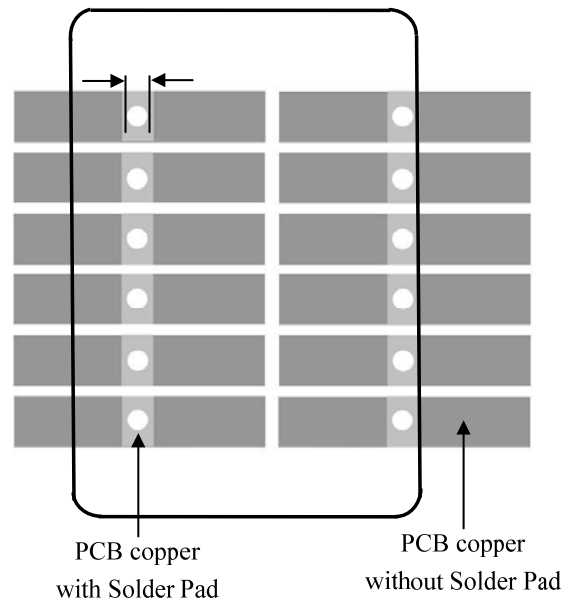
Top View of the Bottom Side of the recommended PCB Foot-print
